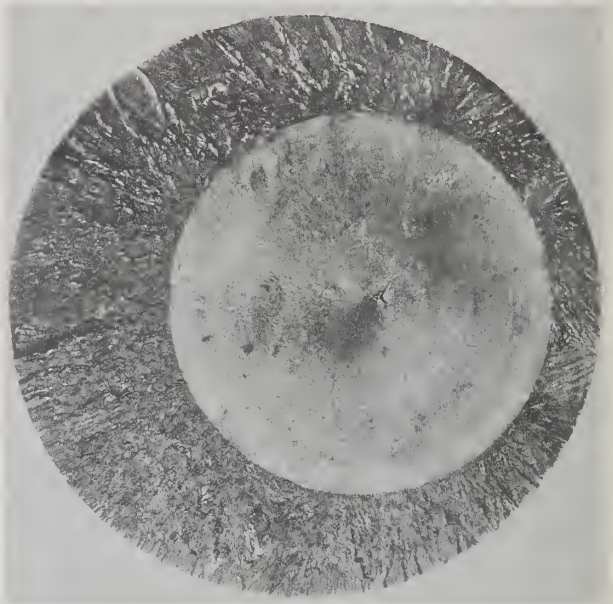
Fracture surface of a piston rod from a forging hammer.
